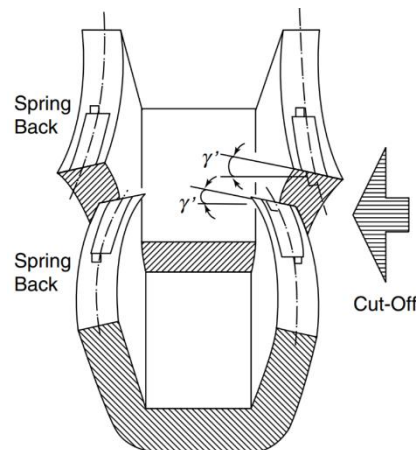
Material spring back after the end cut (Halmos, 2006).
